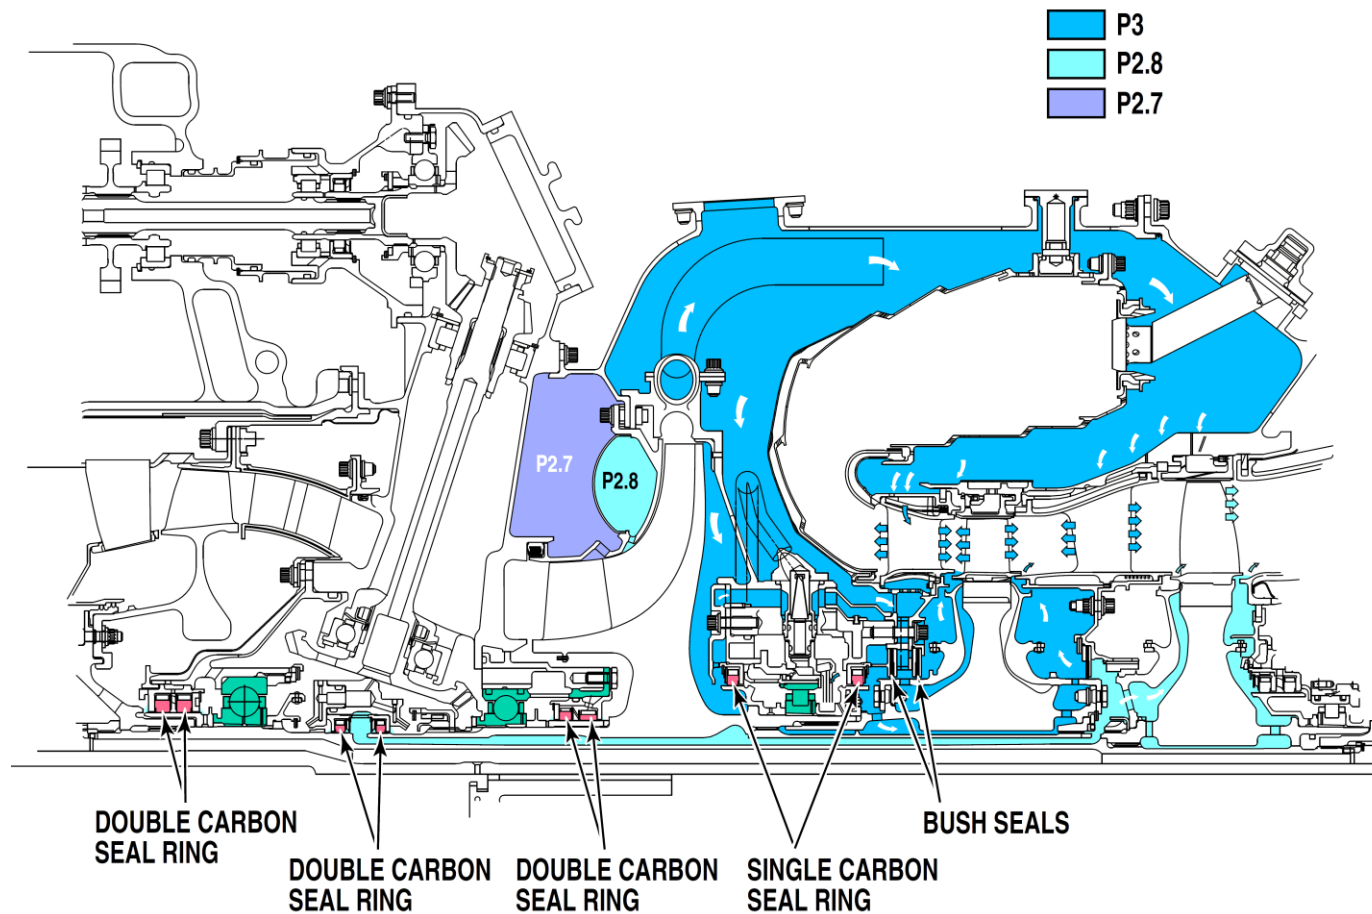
No. 3, 4 & 5 Bearing Cavity
